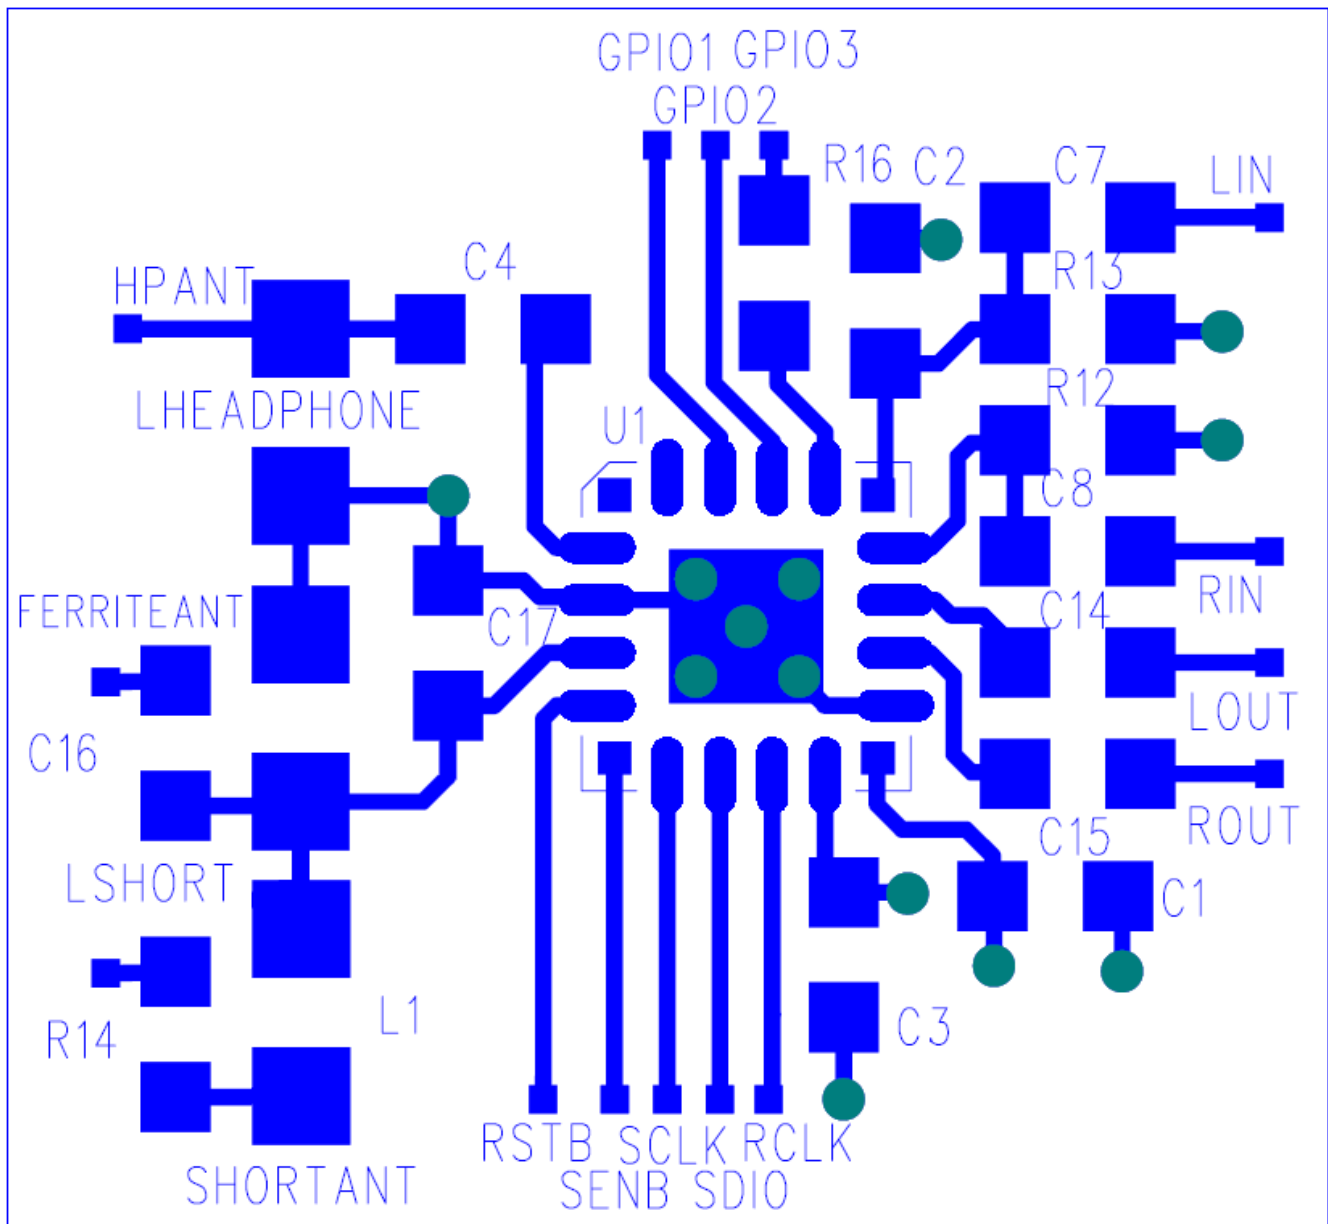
Re-Use Block Layout for Expanded Application Layout (0402 Component Size)
